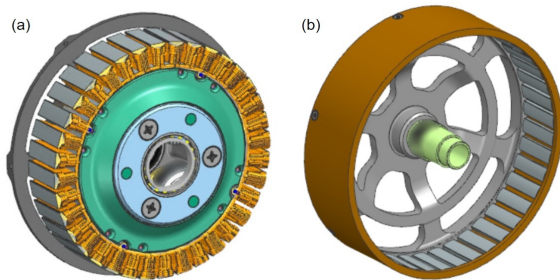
Motor Stator with Integrated Geared Transmission (a), Motor Rotor Attached to Sun Gear (b)
